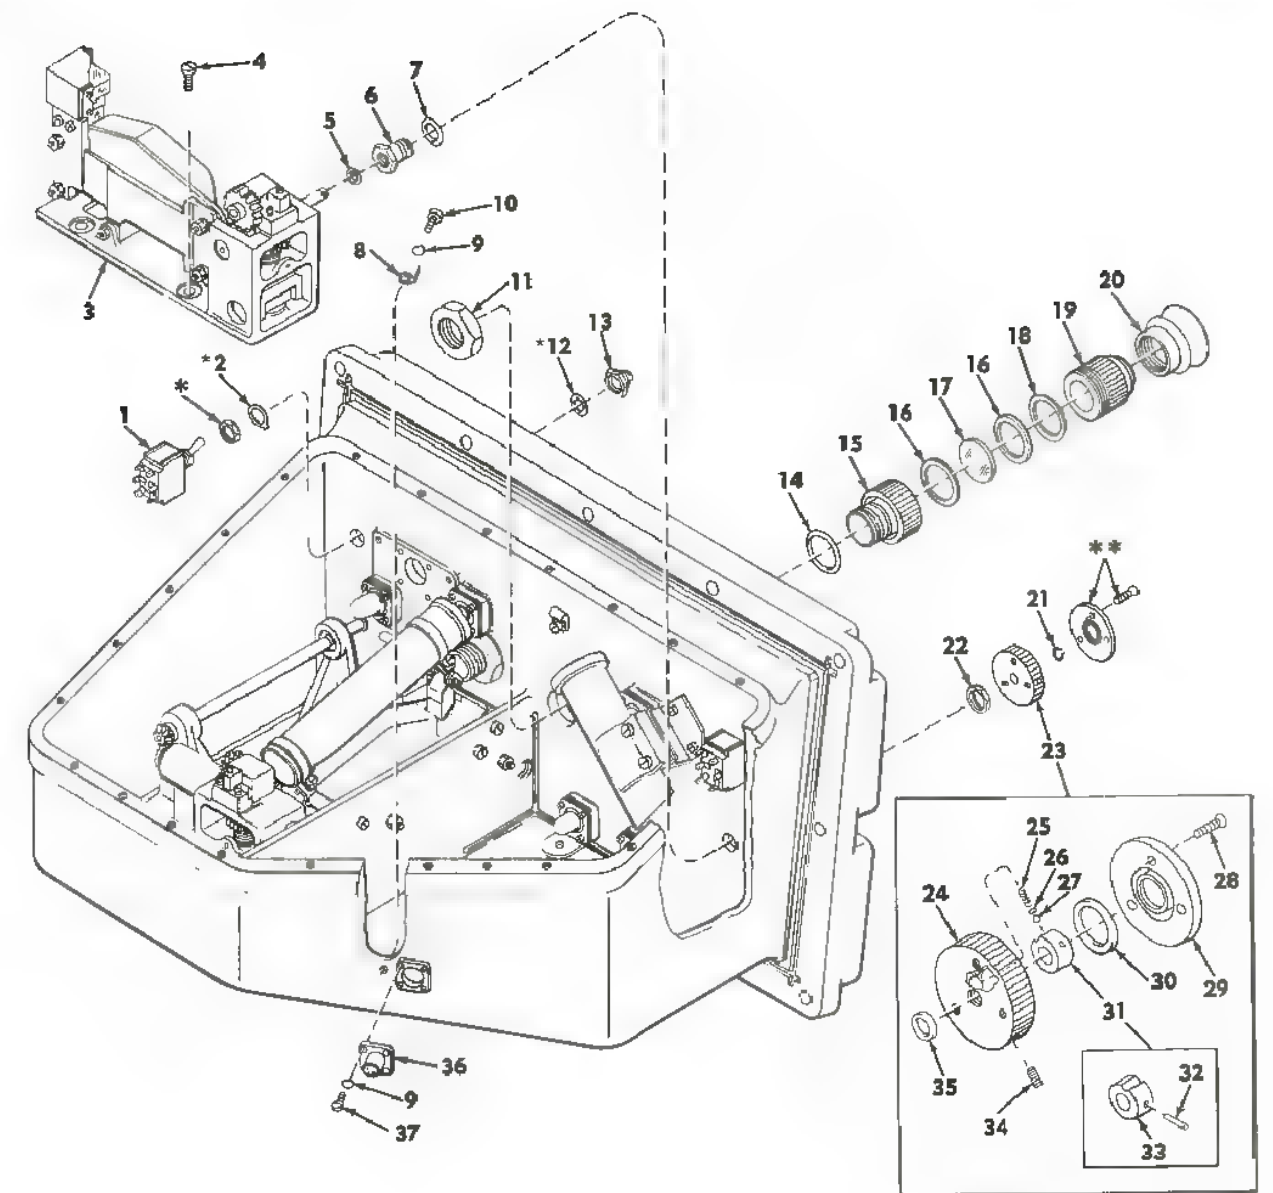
PEDESTAL /8171633/-PARTIAL EXPLODED VIEW
